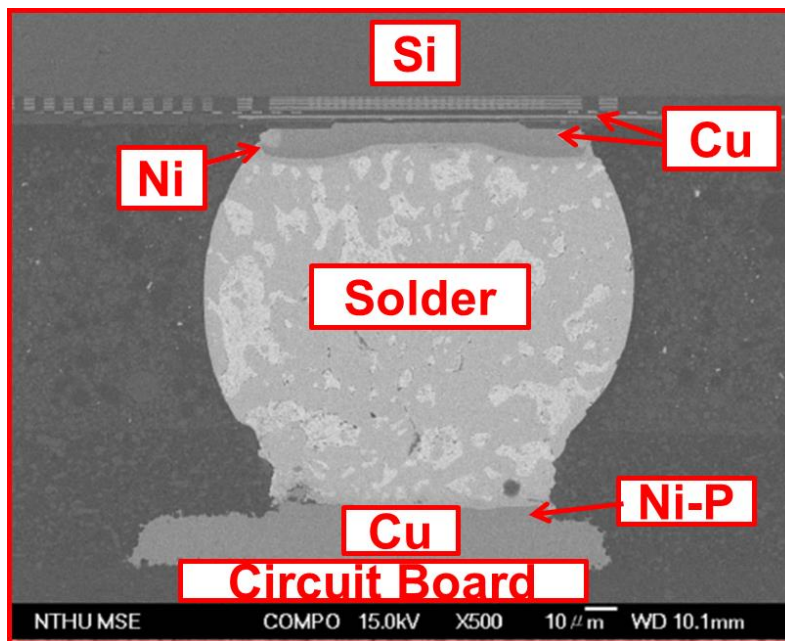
Micrograph of a flip chip solder joint. Figure adapted from Reference [3].
